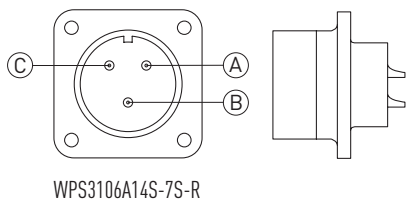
Connector assignment for brake, 1,000 W and above
